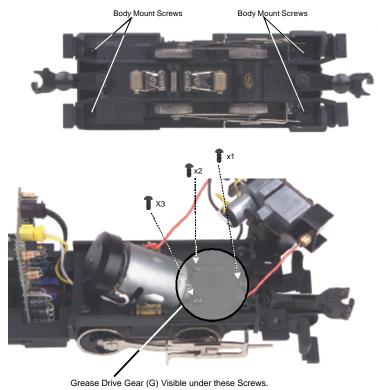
Locations of the Body Mounting Screws and Adding Grease to the Gear Box
